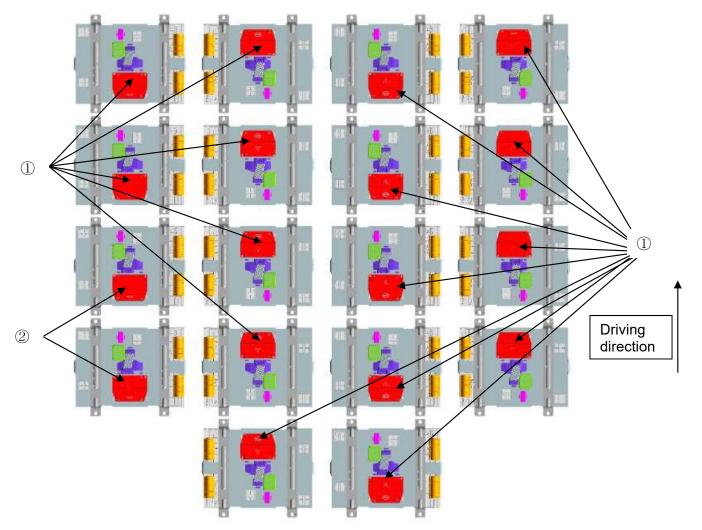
BMS Collector Layout (Roof Top Battery Pack)
